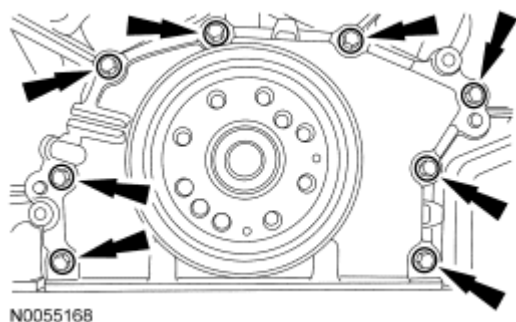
Locating Crankshaft Rear Seal Retainer Bolts
